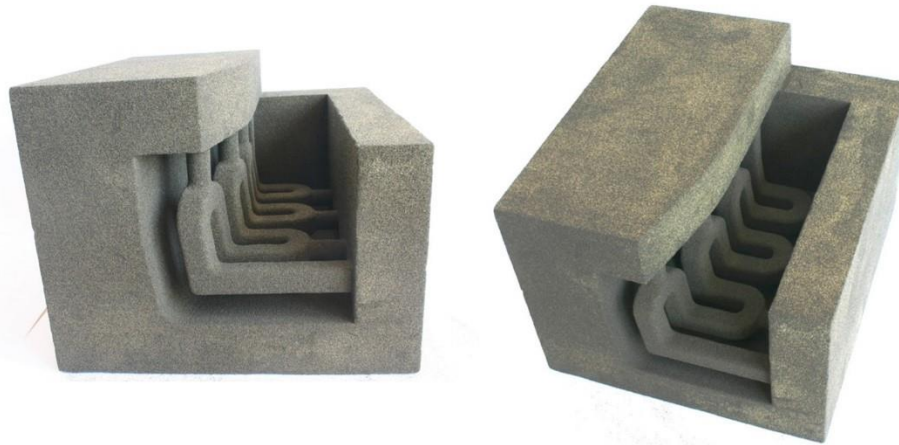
A printed sand mold with cavity and cores for cooling channels.
